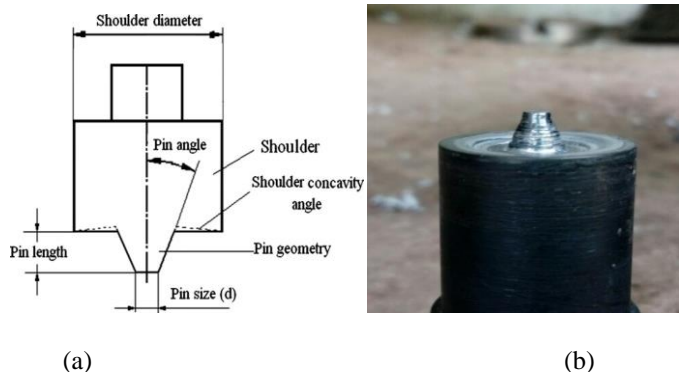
(a)Cross-sectional view and (b) Conical pin tool used in friction stir welding.
